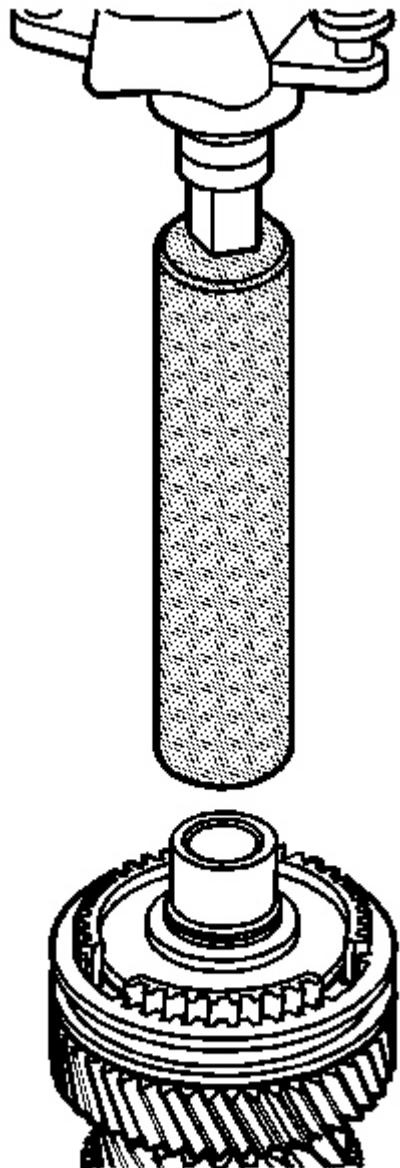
Installing 5th/6th Synchronizer Hub Assembly
